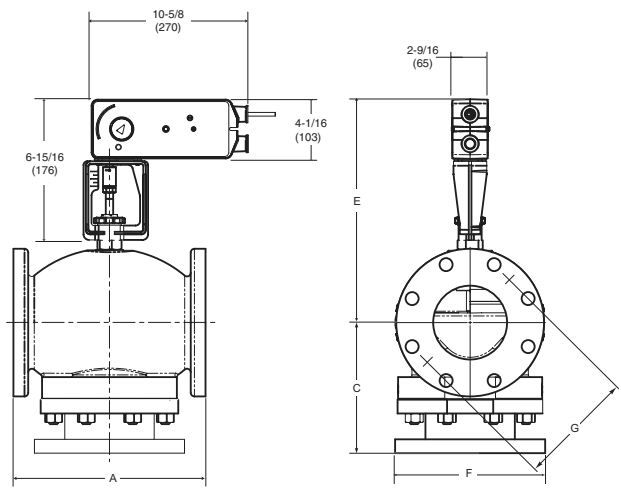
Mx61-720x with 2-1/2" to 5" Flanged 3-Way Globe Valves
